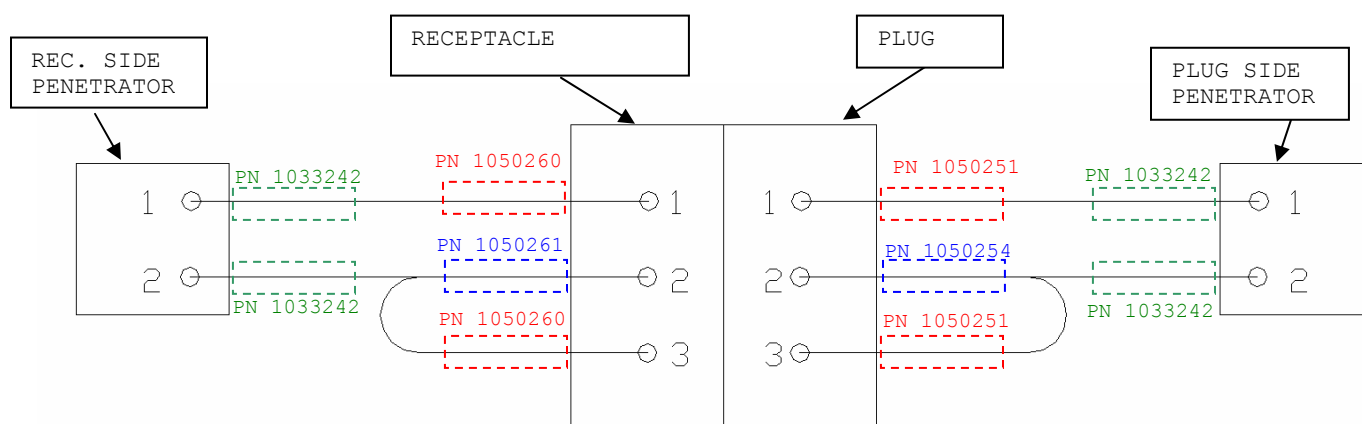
CONNECTORS SOLDERED TO PENETRATORS WITH BOOT SEAL PART NUMBERS
